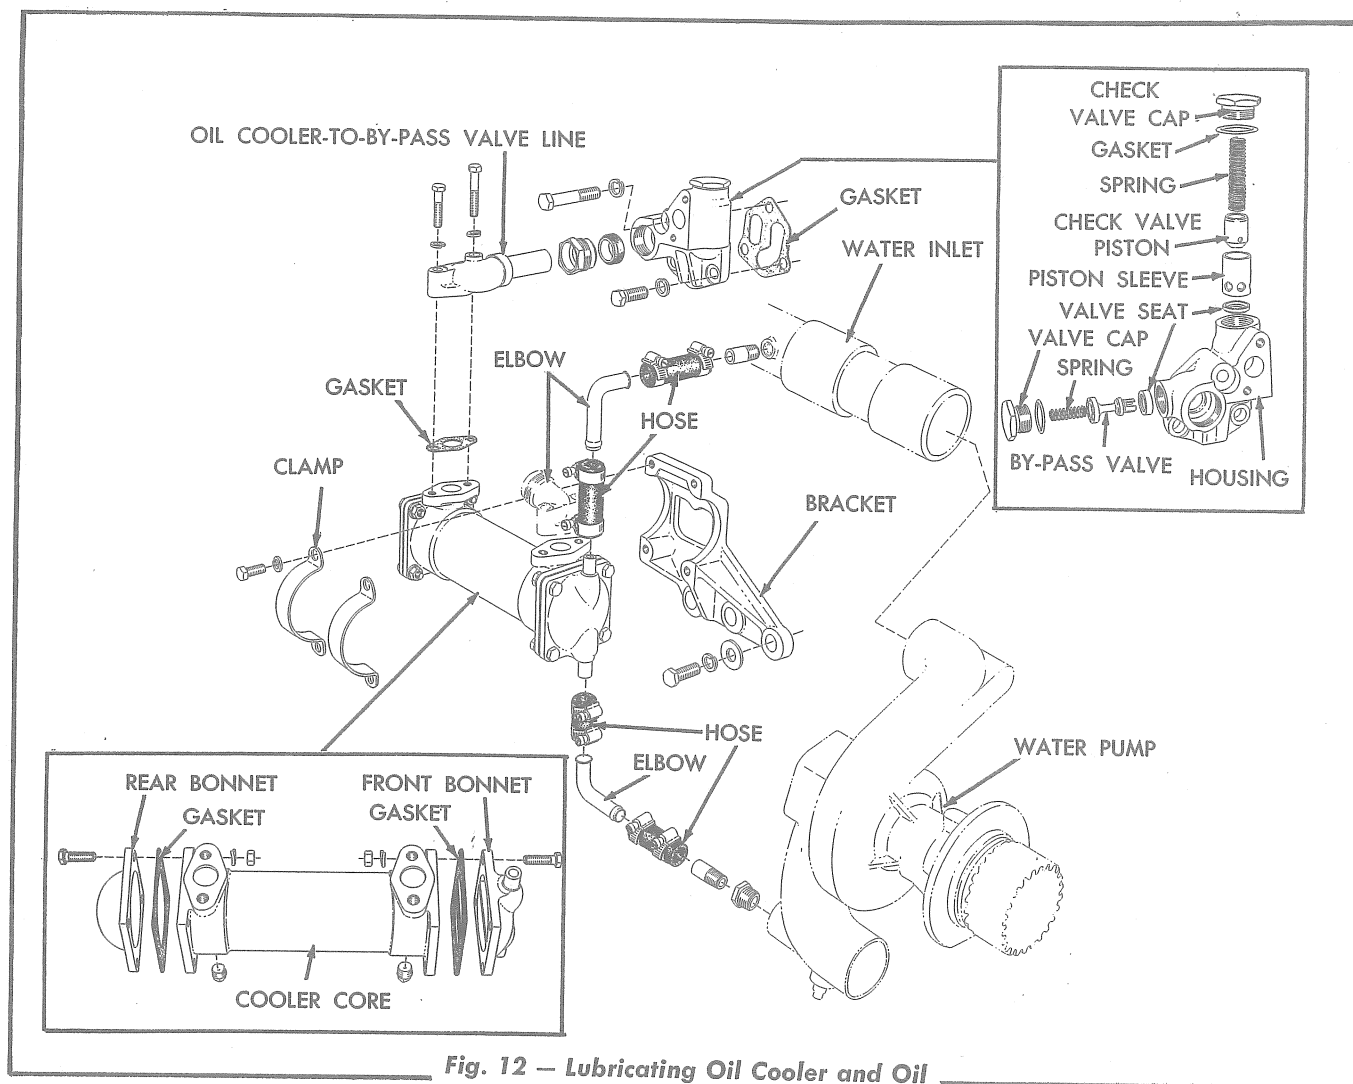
Lubricating Oil Cooler and Oil By-Pass Valve Details (Tractors Prior to Serial No. 4001)
